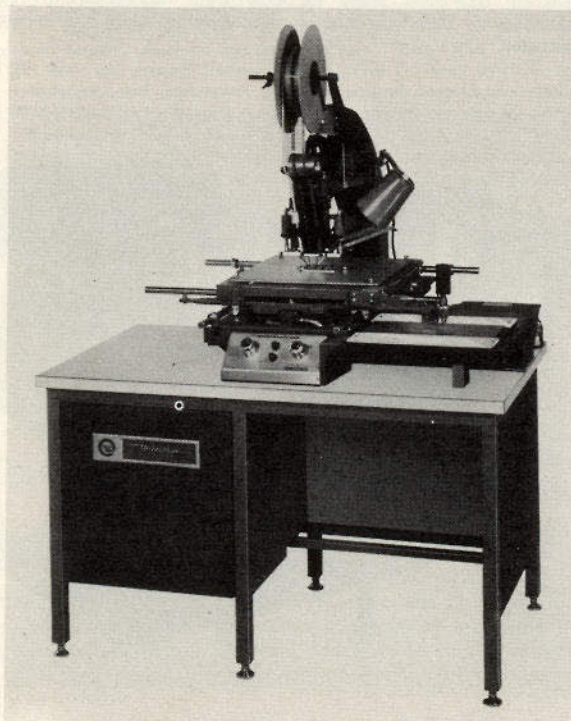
Single-station manual pantograph board-locating insertion machine. Best economy is obtained when several units of a specific component are inserted into a given board in one setup.
